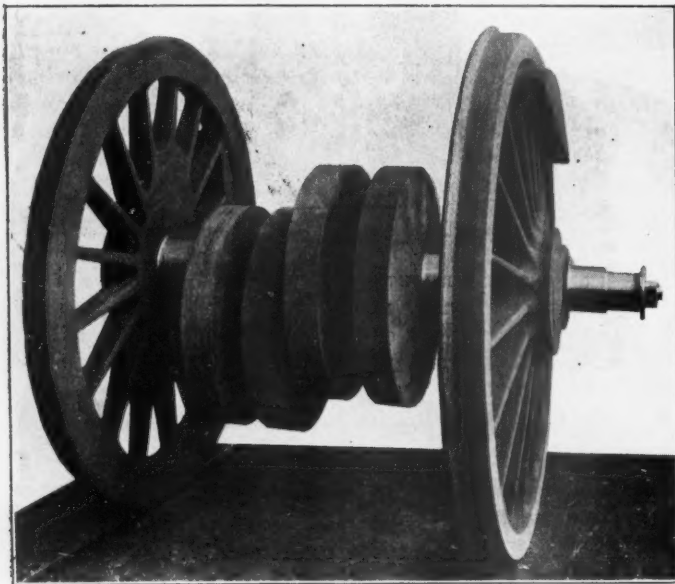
A.—BUILT UP CRANK AXLE WITH FOUR CIRCULAR CHEEKS AND FIVE PINS.
